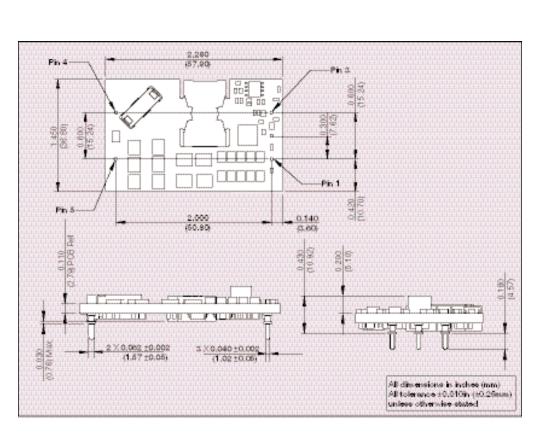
Horizontal Mechanical Drawing and Pinout Table
